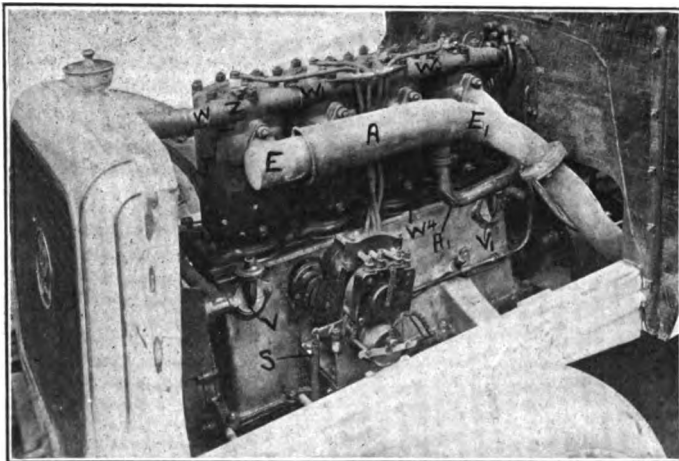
Exhaust side of Panhard Knight motor, showing magneto advanced and hot air intake
